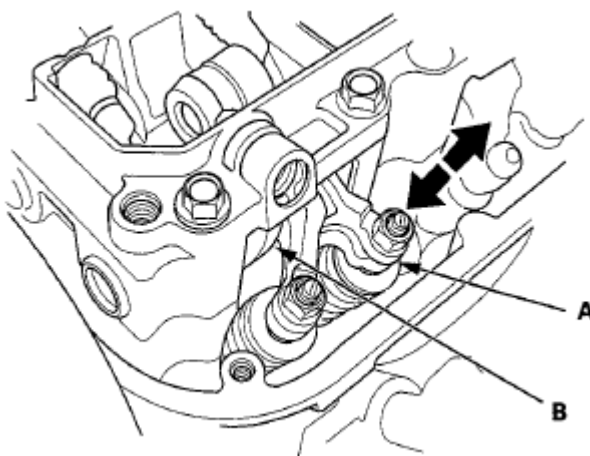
Identifying Intake Primary & Secondary Rocker Arm Moving Position
